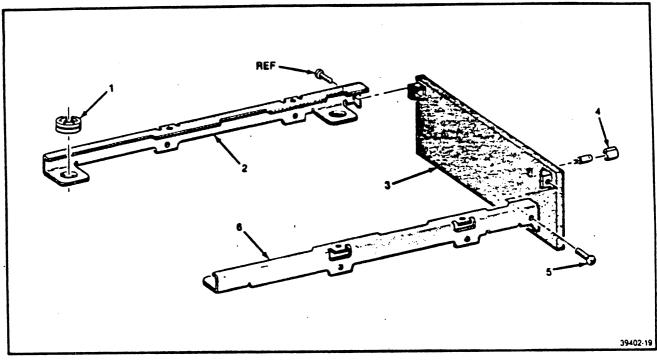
FRONT PANEL AND RAIL ASSEMBLY
